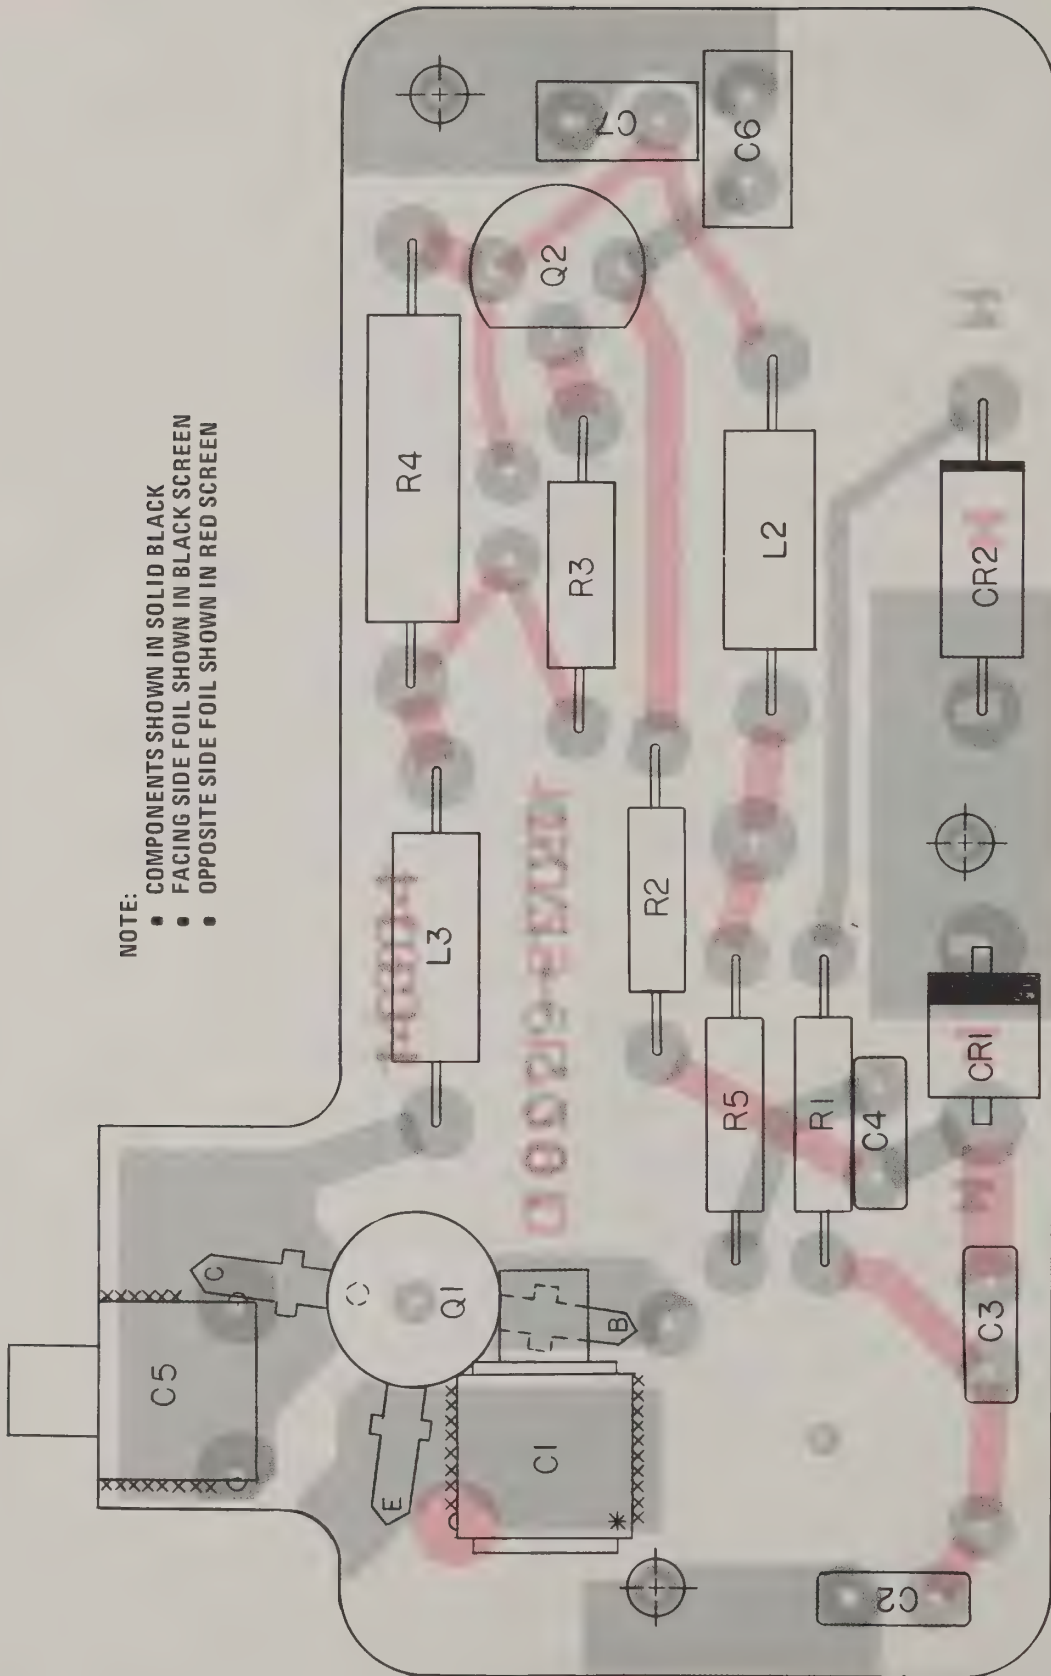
UHF Tx Multiplier Board Assembly A1, Component Location Diagram
